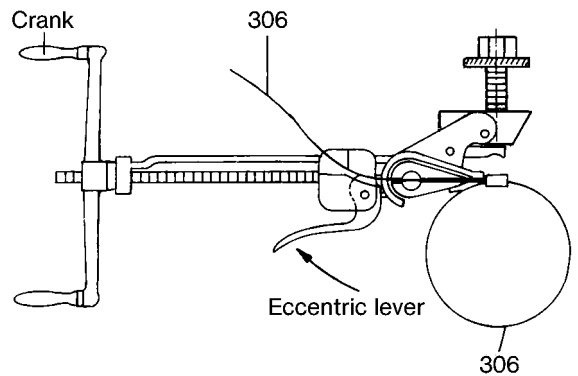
Clamping the clamping band by means of clamping tool Band-It and adapter J050.
